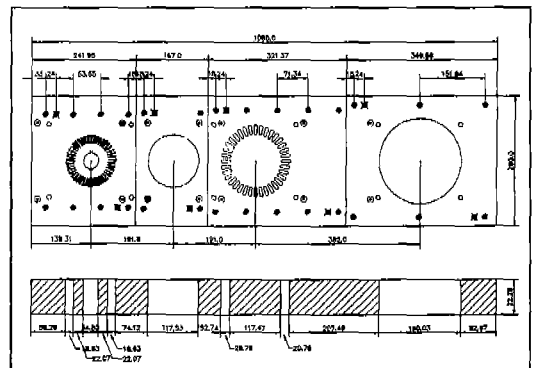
Part drawings for a upper Die of stator and rotor: c) stripper plate
